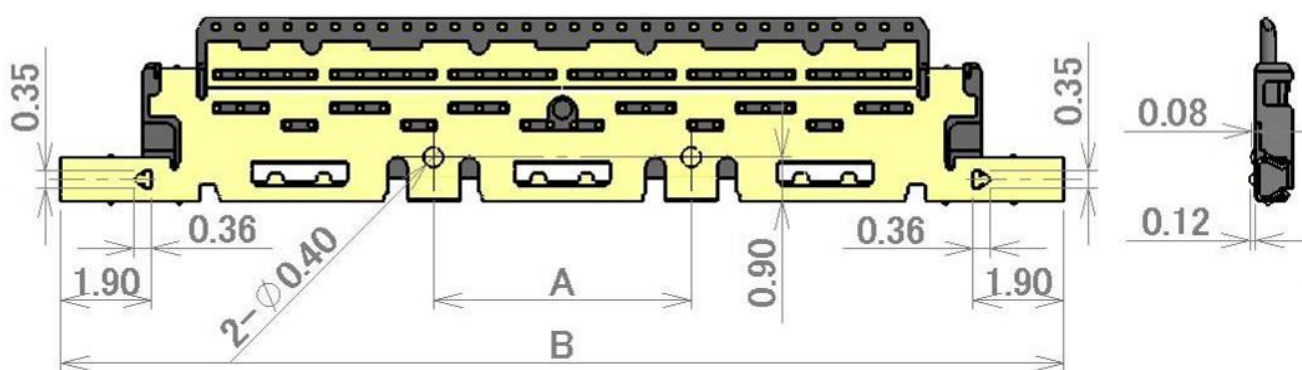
The Shell Bottom Side of Plug Housing Assembly
